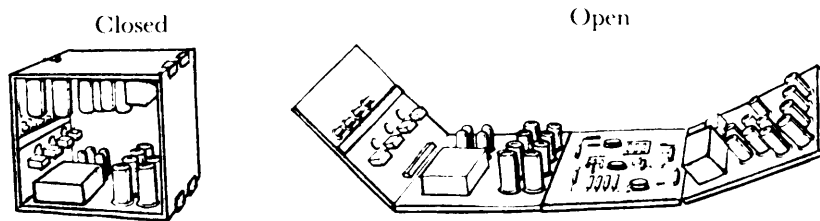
Foldout Construction for Electronic Chassis (Ref. 3)
